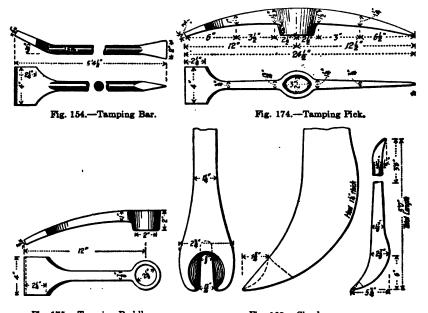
Tamping Puddle. Fig. 162.—Clawbar.
